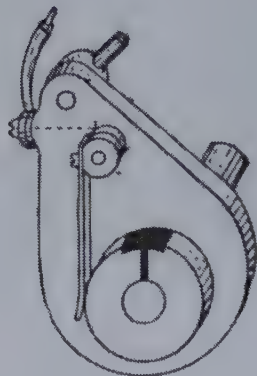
A simple form of Brush Timer for a single Cylinder Engine.
